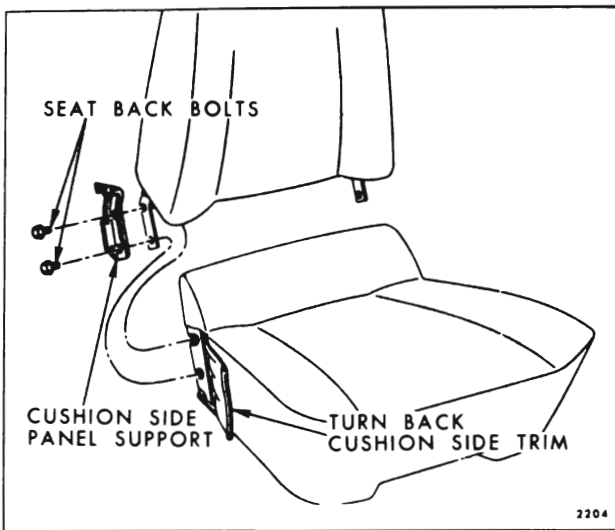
Bucket Seat Back Removal (Without Reclining Seat Back) - All Except Corvair
